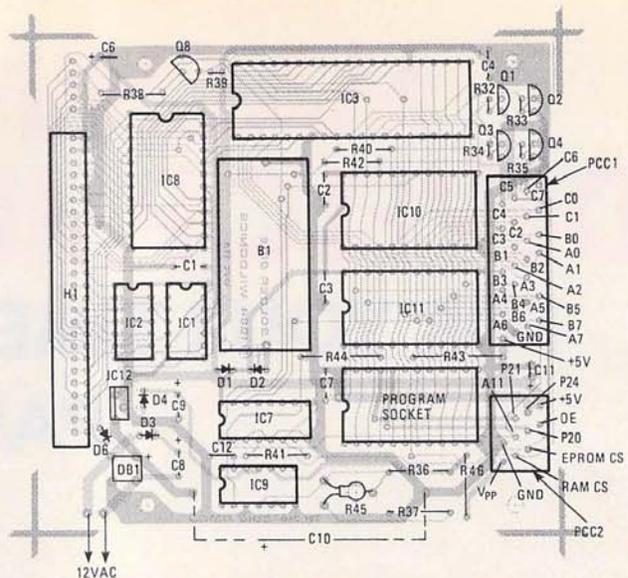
PARTS PLACEMENT ON THE MAIN BOARD is shown in this diagram. Take care to observe the proper polarities for all components.
